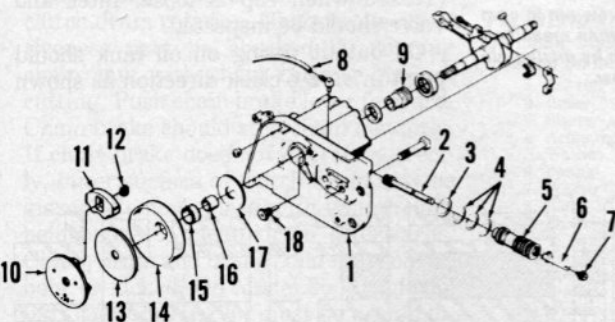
Exploded view of oil pump used on all 350 and early 360 models and clutch used on later 350 and early 360 models.
